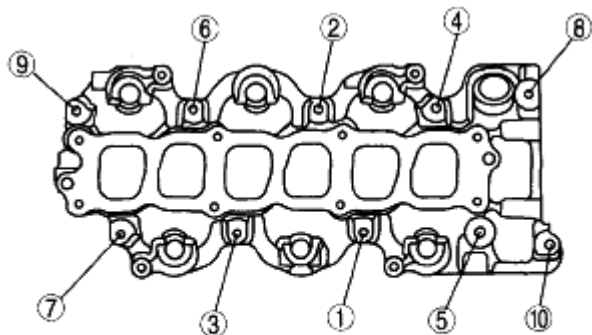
Identifying Intake Manifold, Thermostat Component & Torque Specification
